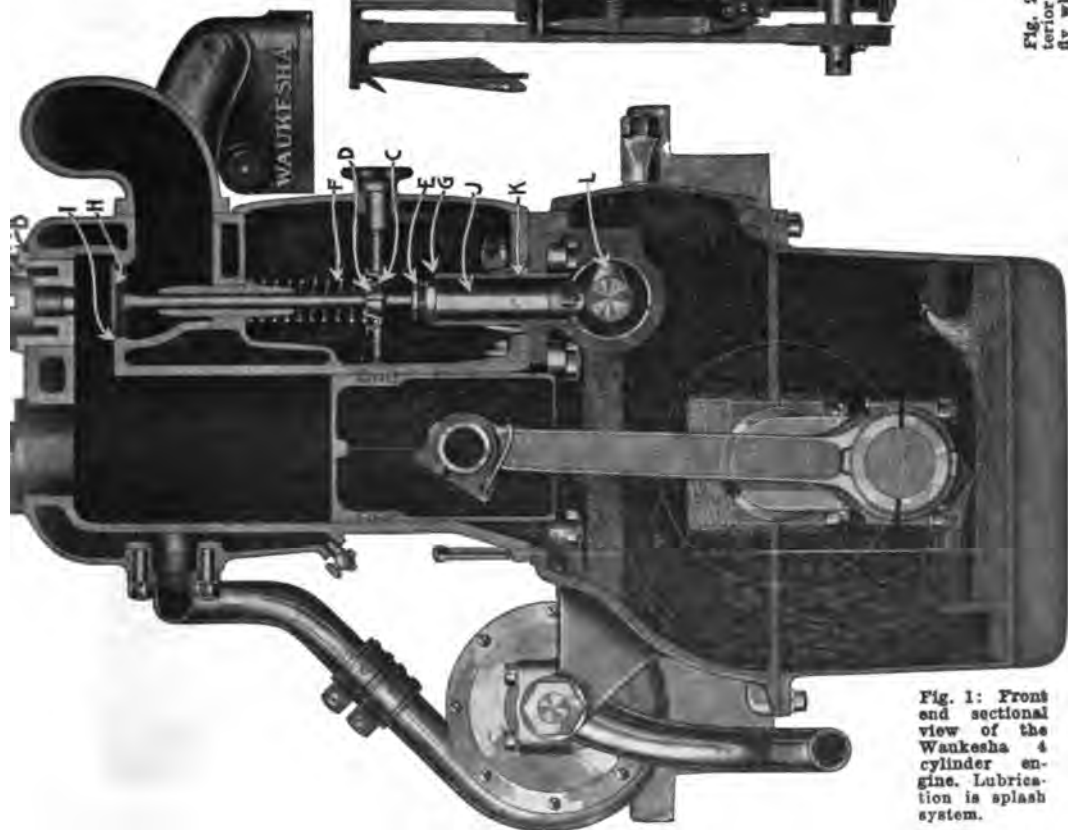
Front end sectional view of the Waukesha 4 cylinder engine. Lubrication is splash system.
